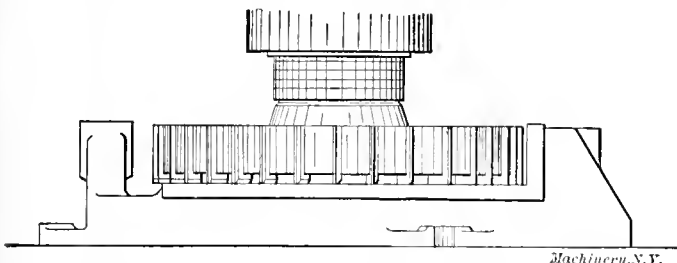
Finishing the Top of the Base for the Movable Jaw.
